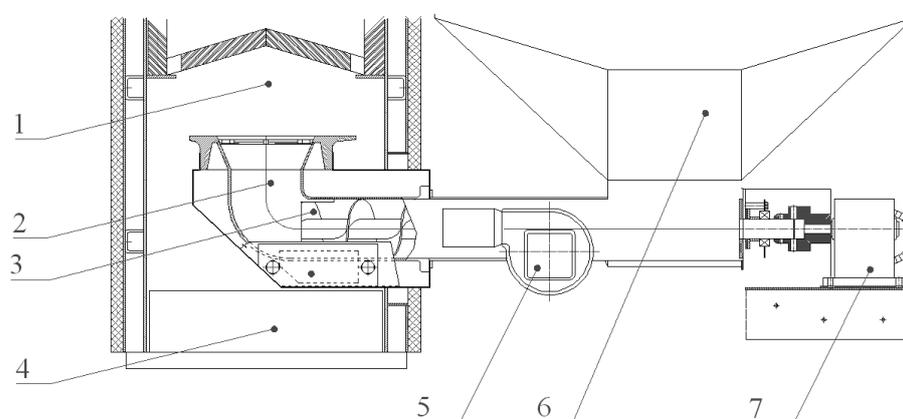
Combustion retort device with bottom fuel supply (1—combustion space; 2—retort; 3—screw feeder; 4—ash tray; 5—combustion fan; 6—fuel bin; 7—motor with gearbox).
